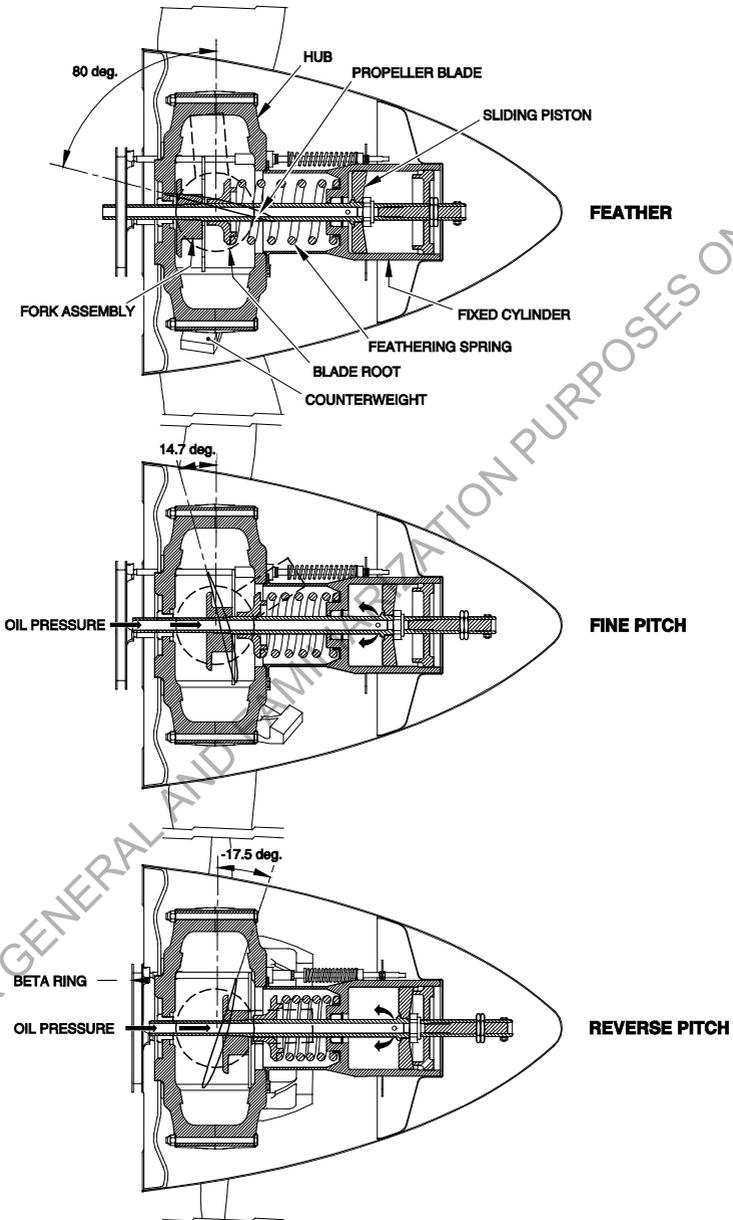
5-Bladed Propeller Pitch Mechanism
